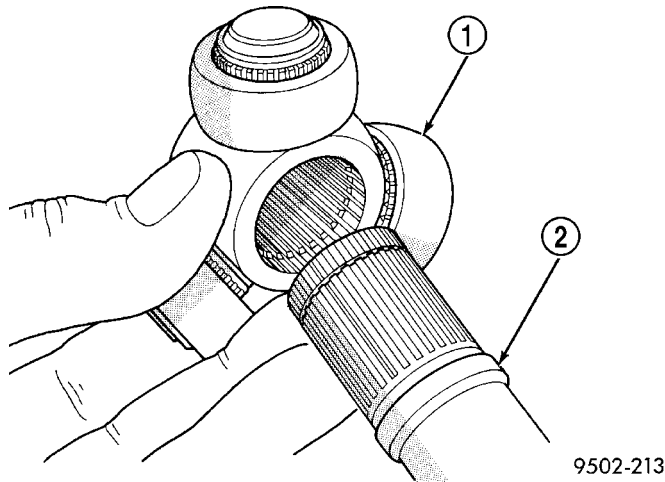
Spider Assembly Installation on Interconnecting Shaft
